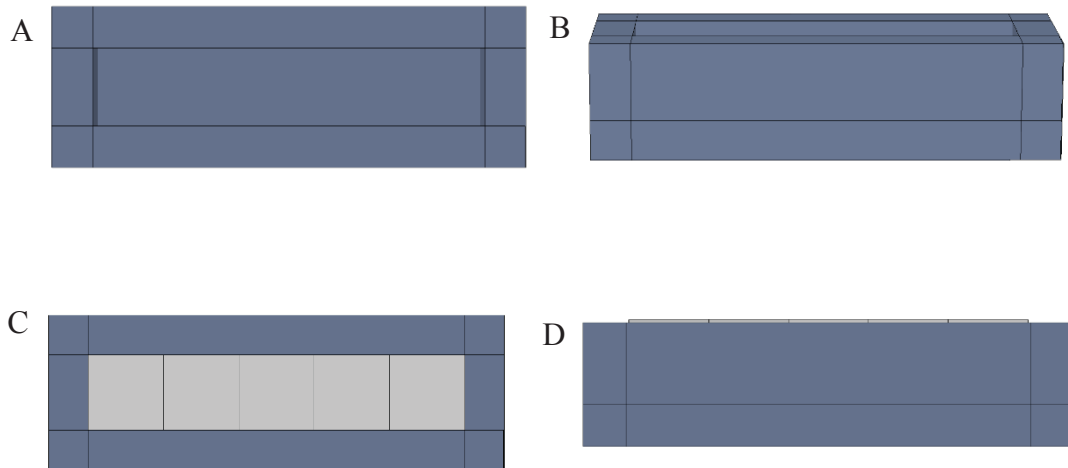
Illustration of the holder component. A, B) The top and side of view of only the component. C, D) The top and side view with magnets within the component.
